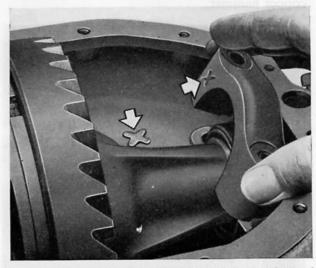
Fig. J.II. The identification mark cast in the housing and stamped on the right-hand bearing cap to ensure correct reassembly of caps
